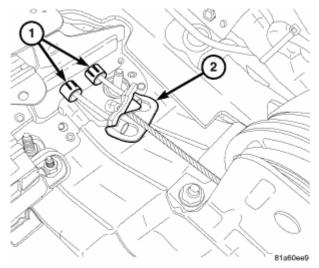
Identifying Cables & Equalizer Courtesy of CHRYSLER LLC
